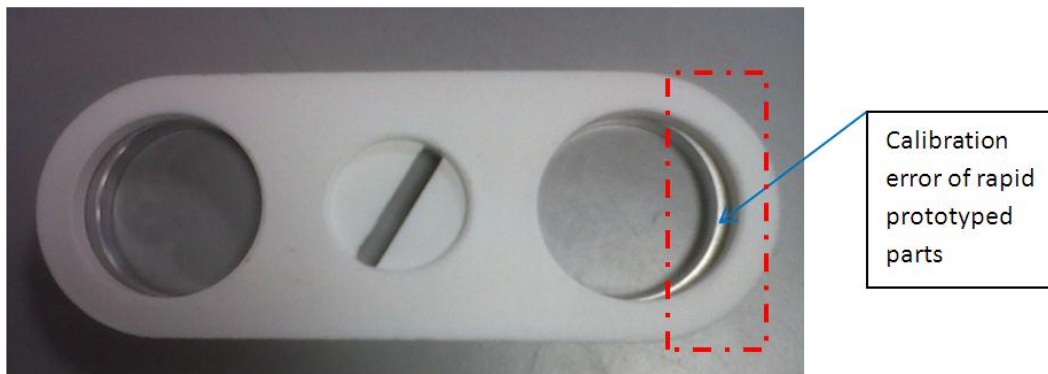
Support Motor Plate - Difference in Machined Part vs. Rapid Prototyped Equivalent
